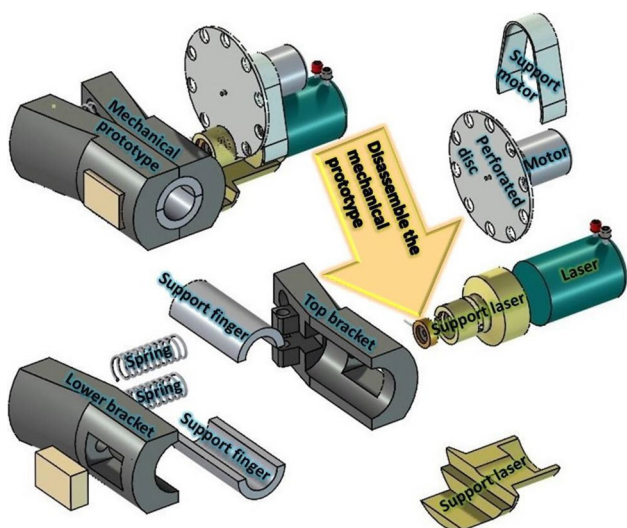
Mechanical hand finger clamp components scheme and prototype mechanical assembly
